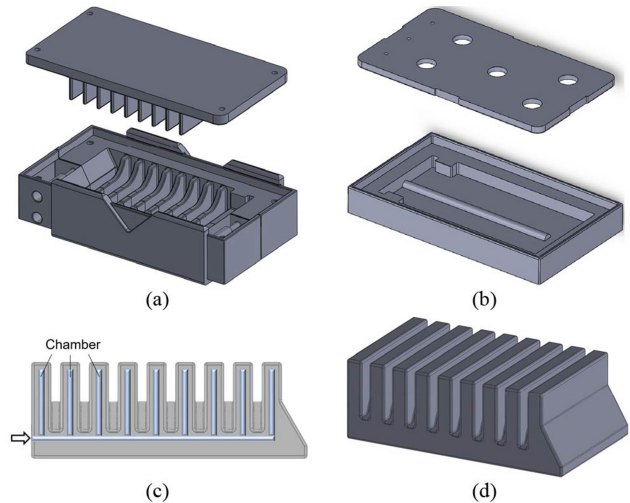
Mold design for the soft pneumatic bending actuator. (a) Mold design for the upper portion of the actuator. (b) Mold design for the lower portion of the actuator. (c) Air intake design. (d) Soft pneumatic bending actuator.
